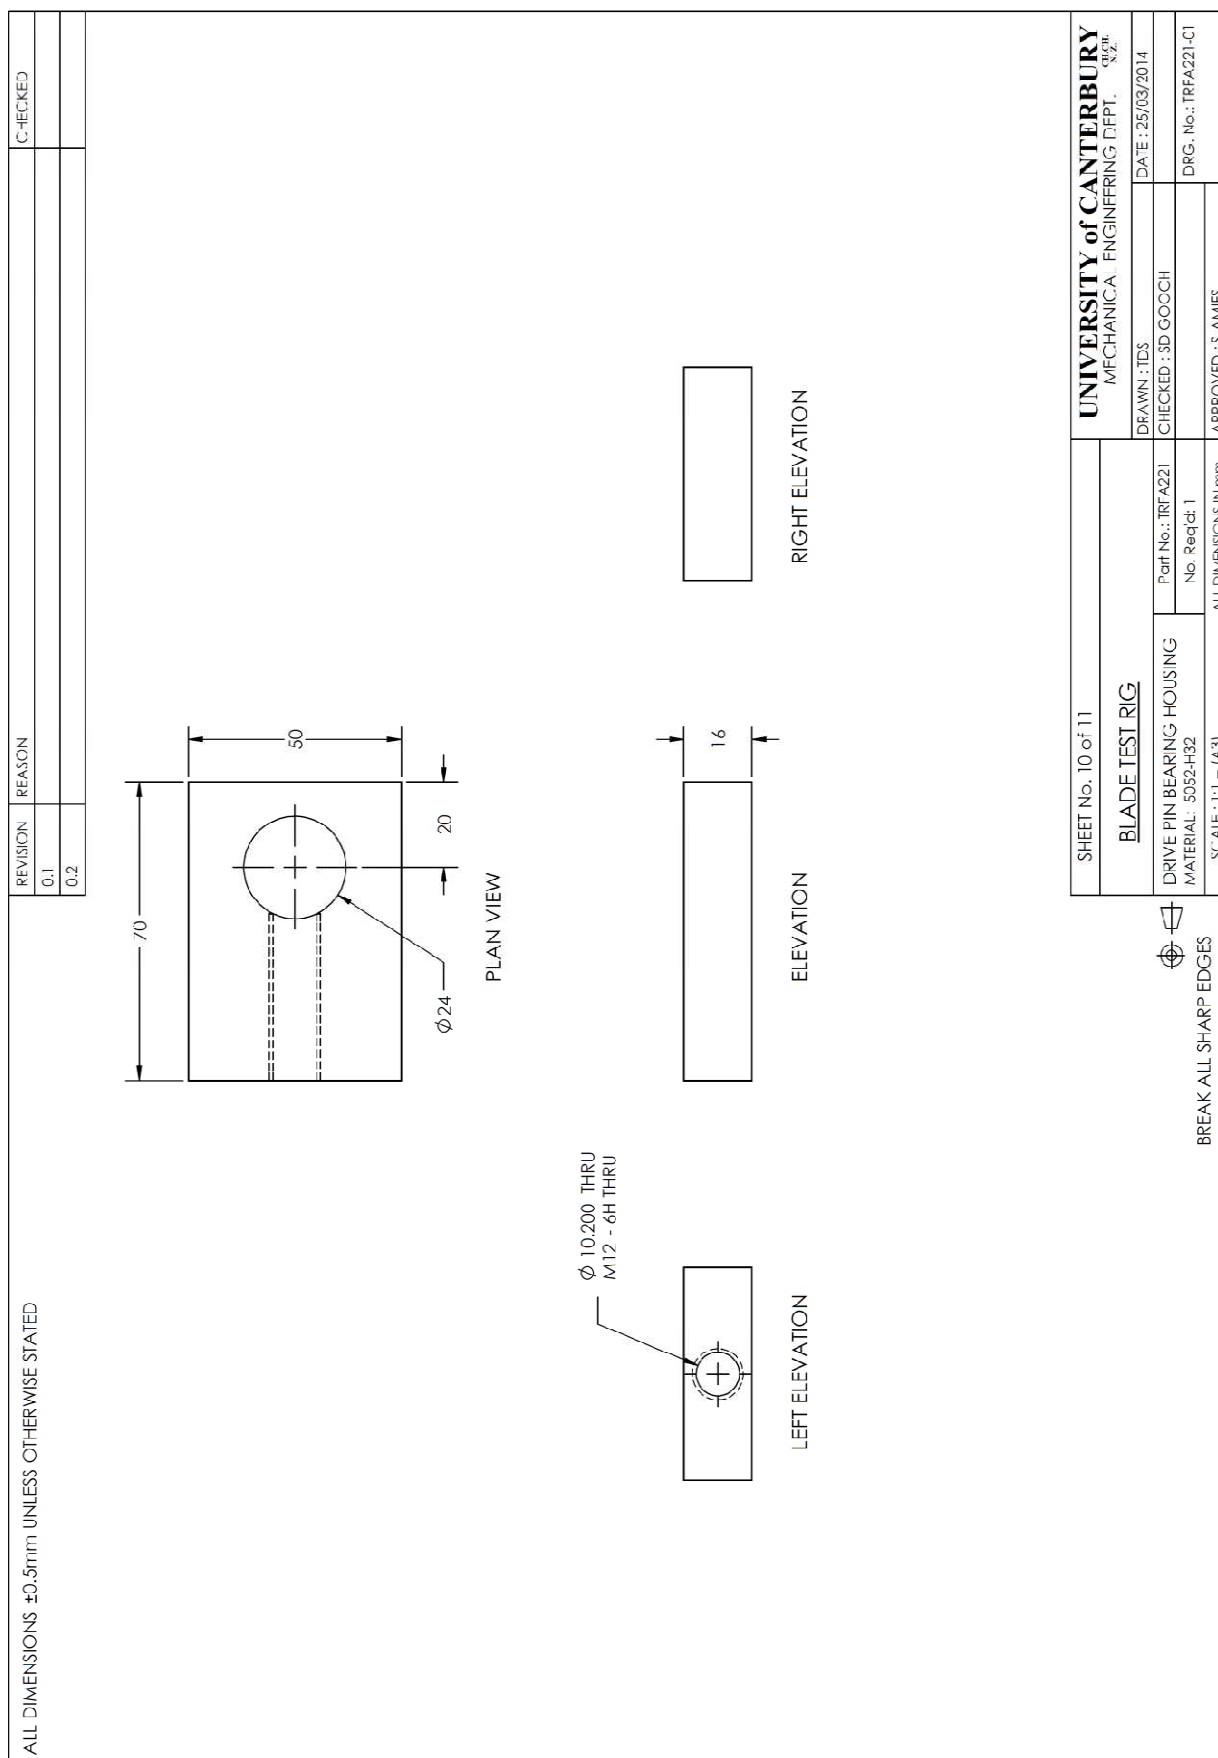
Manufacturing drawing of drive pin bearing housing in fatigue test rig.
